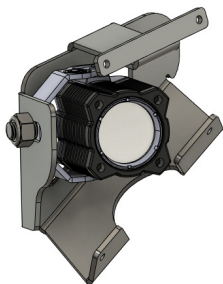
Mount light mounts, hole covers, and light covers depending on desired appearance. Tighten using 9/64" Allen and 11/32" Wrench
